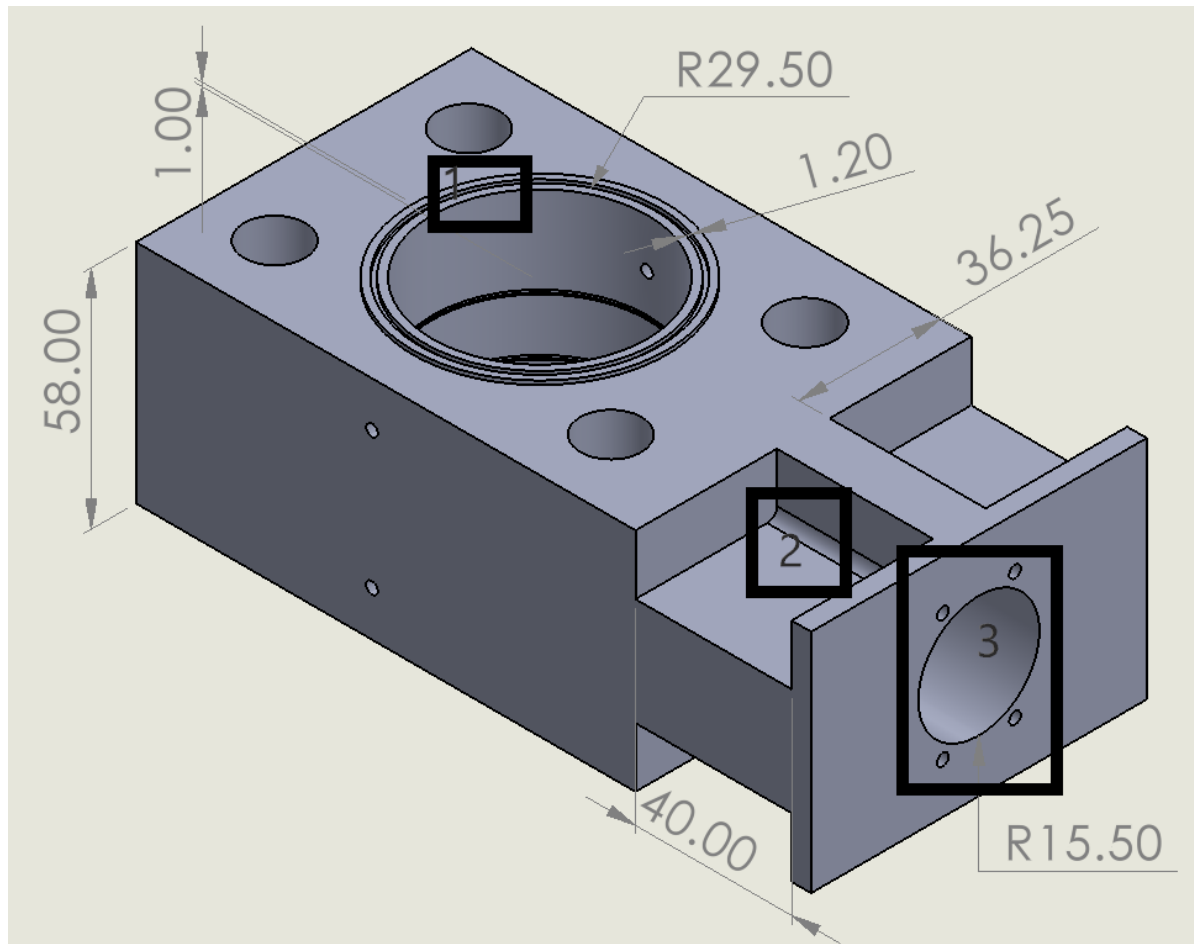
Full CAD model of actuator mount (all dimensions are in mm)
